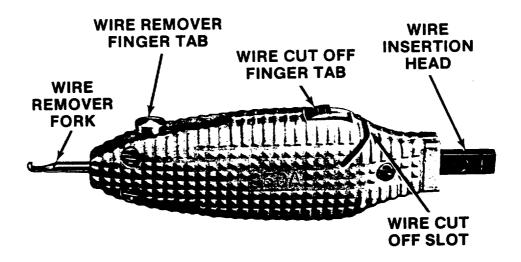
950A Cutoff/Insertion/Removal Tool (DA)
